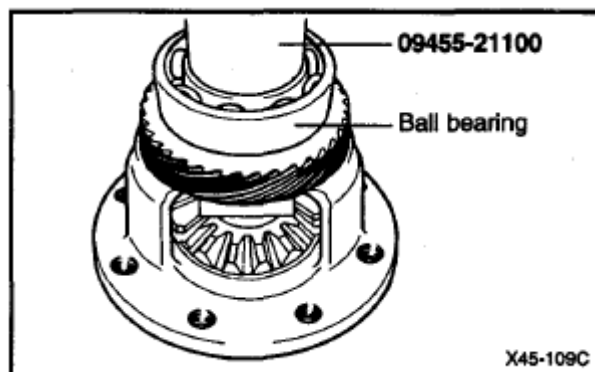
Pressing Bearings Onto Both Ends Of Differential Case
